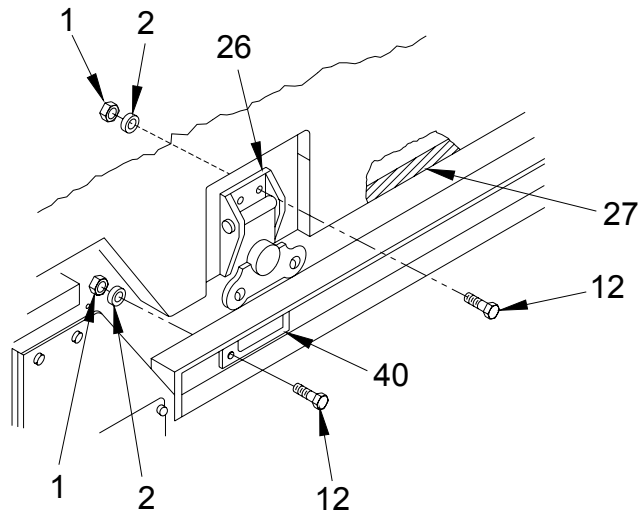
FRAME AND HOUSING ASSEMBLY/MAIN ACCESS COVER
